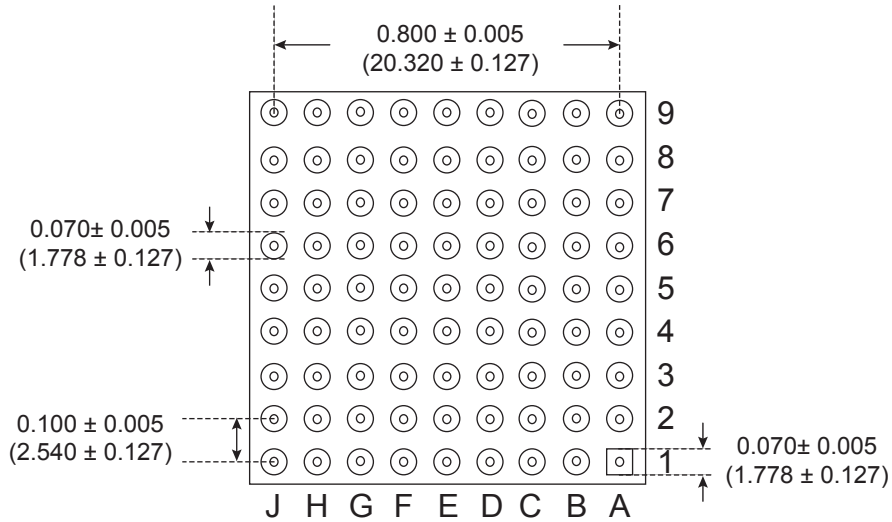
Pin Grid Array Package Dimensions (PGA-81)
